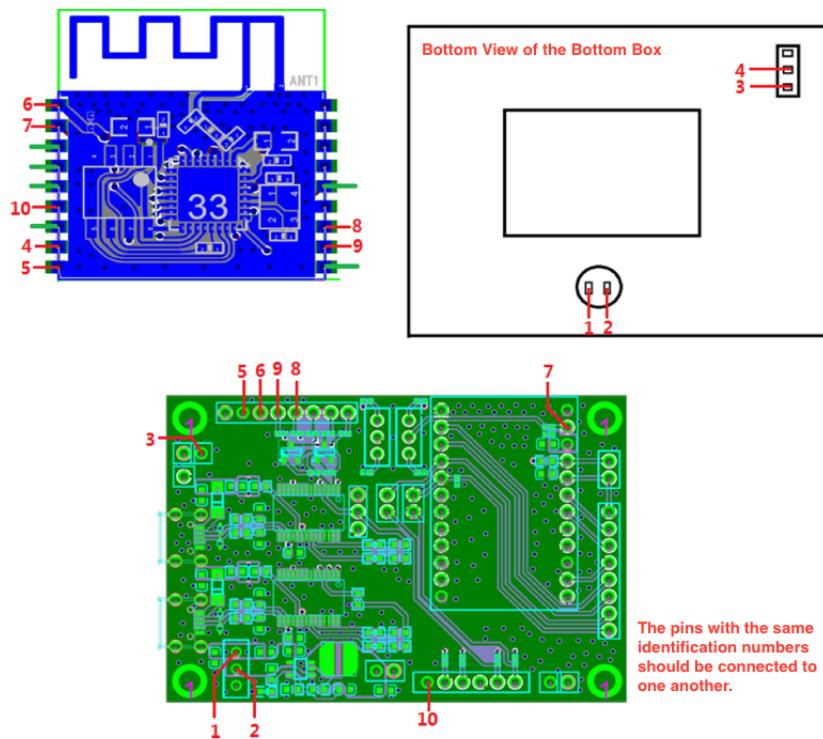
The Wiring of the ESP-WROOM-02 Fixture
